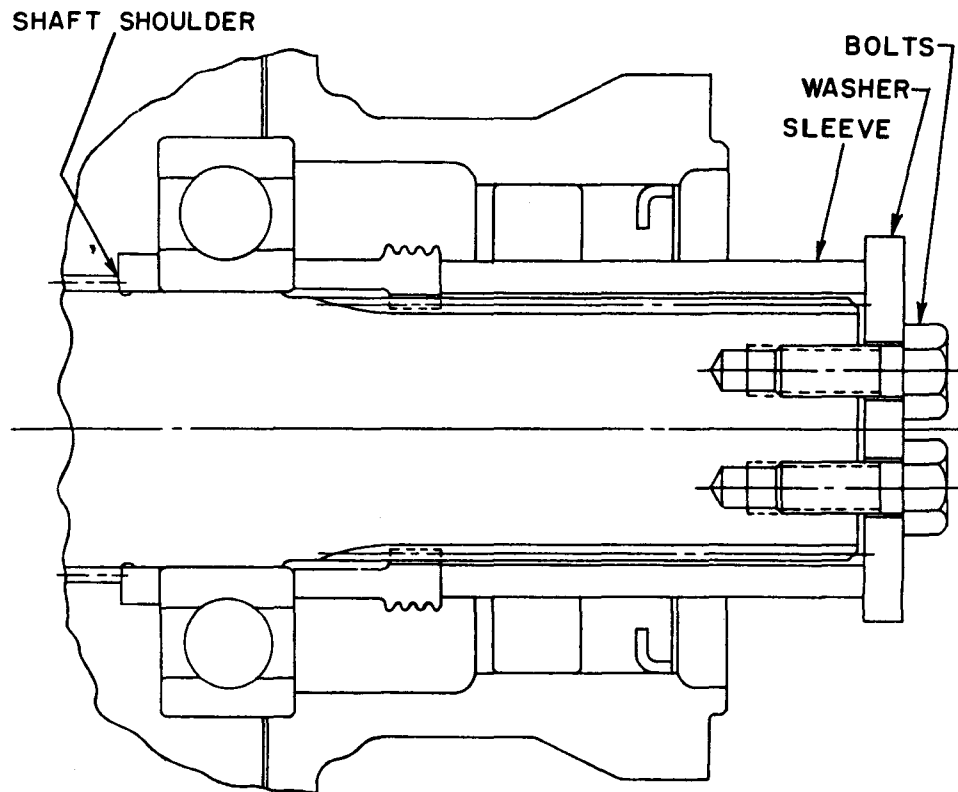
Special tool for seating output shaft parts before installing flange
